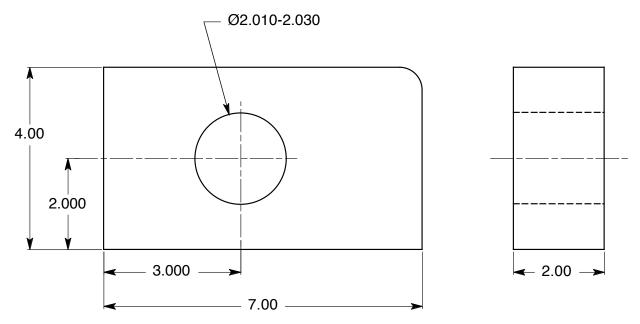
A feature of size located to plane surfaces on an untoleranced drawing
